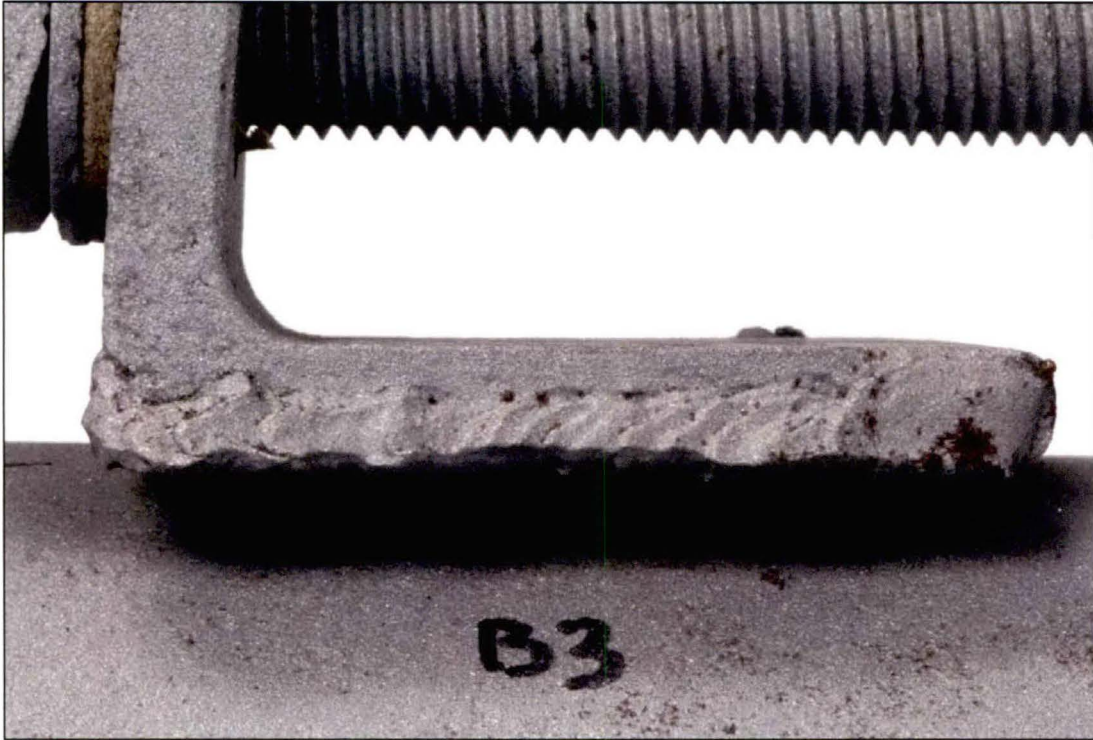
Image of the Lug B3 bottom weld with no fusion.
